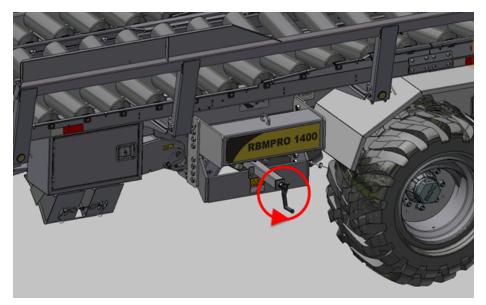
Disengaging the RBMPRO 1400 Handbrake
